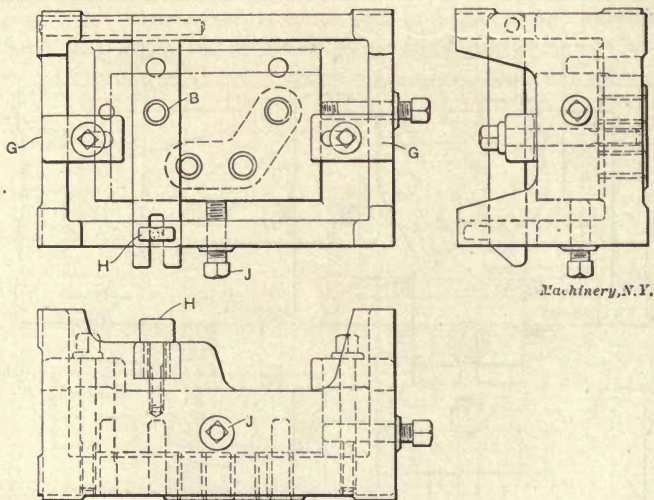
Jig where Thrust of Drilling Operation is taken by Clamps
